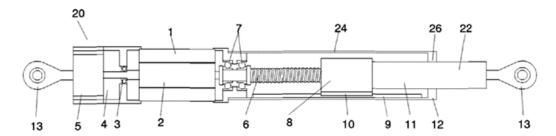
illustrates a gearing comprising primarily only a screw-and-nut mechanism. Rotation of screw (6) results in linear movement of nut (8).
